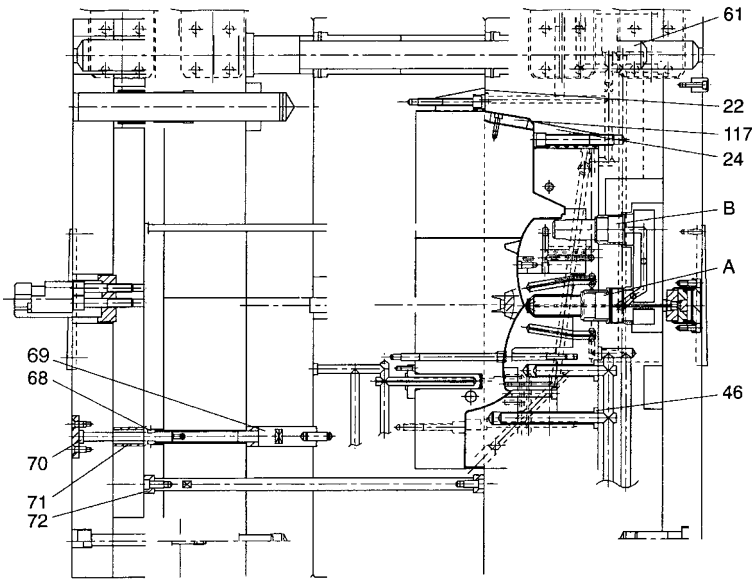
A: needle shutoff nozzle; B: nozzle with edge gate; 22, 24: wedges; 46: cooling probe; 61: guide pin; 68–71: ejector retraction device; 72: return bar; 117: tapered surface
